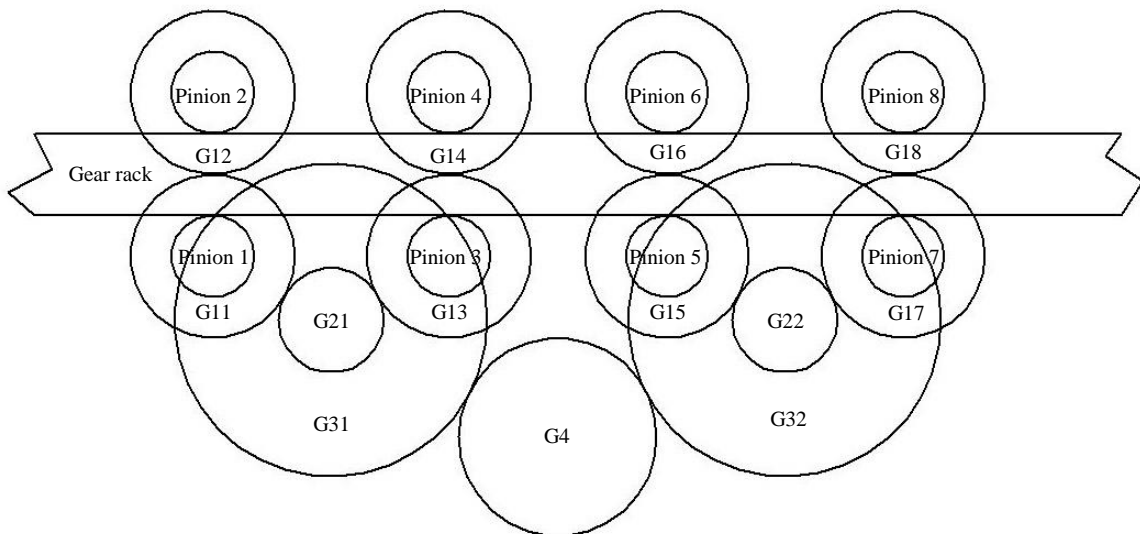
Schematic picture of the Cascade gearbox with names of all gears.
